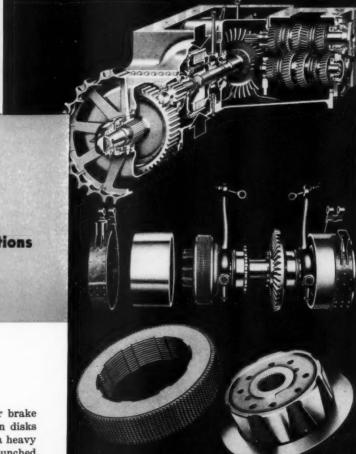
Earth-moving tractor brake which uses friction disks of 23 in. diameter to provide high braking torques. Brake engagement is hydraulically controlled
